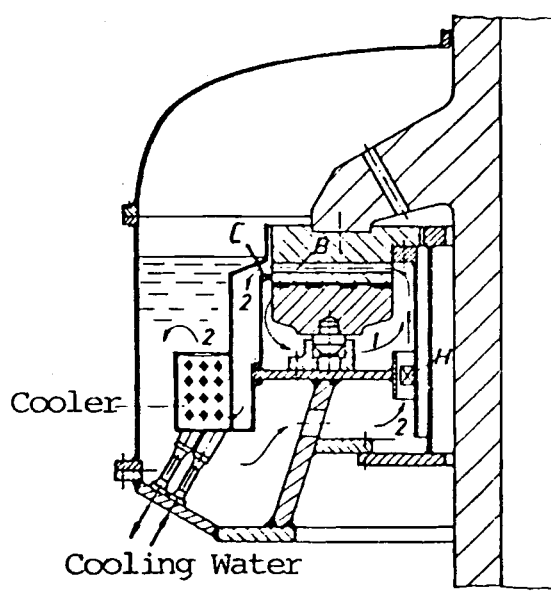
Elevation of an axial thrust bearing with tilted segments, oil lubricated. Cooler in a non - pressurized oil tank. Circulation by axial booster pump H, radial bore B and baffle C past outlet from B. Oil flow through the bearing and the lubricating gap 1 in shunt to the oil flow passing the cooler 2. Air separation from the oil after the cooler on the free level of the oil tank. (After Sulzer Escher Wyss.)
